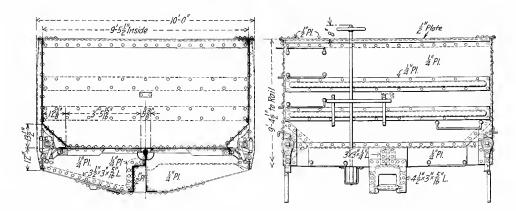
Cross Sections and End Elevation of All-Steel Drop Bottom Gondola Car Shown in Fig. 335.
